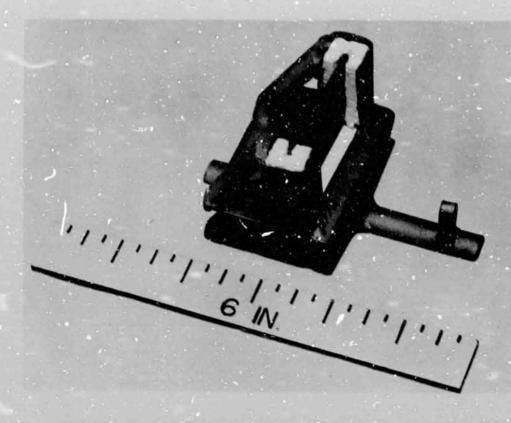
INCONEL 600 FIXTURE FOR BALLISTICALLY IMPACTING SPECIMENS AT 1600° F (with specimen in place)
